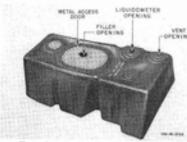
Fuselage Auxiliary Fuel Tank— Top View
